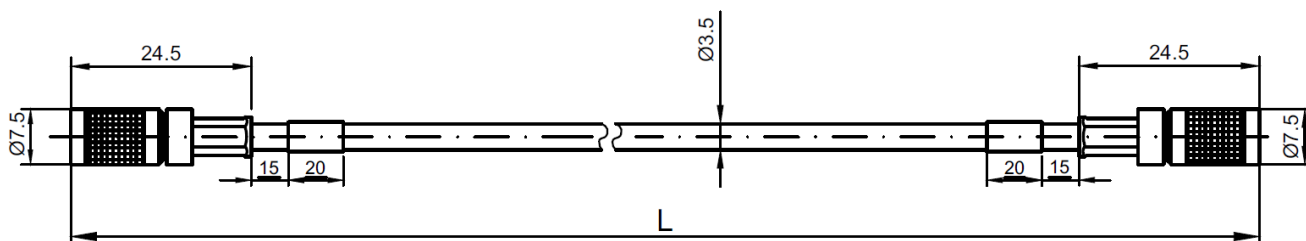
Dimensions of connection cable ds82x.ec100 (no protection)
